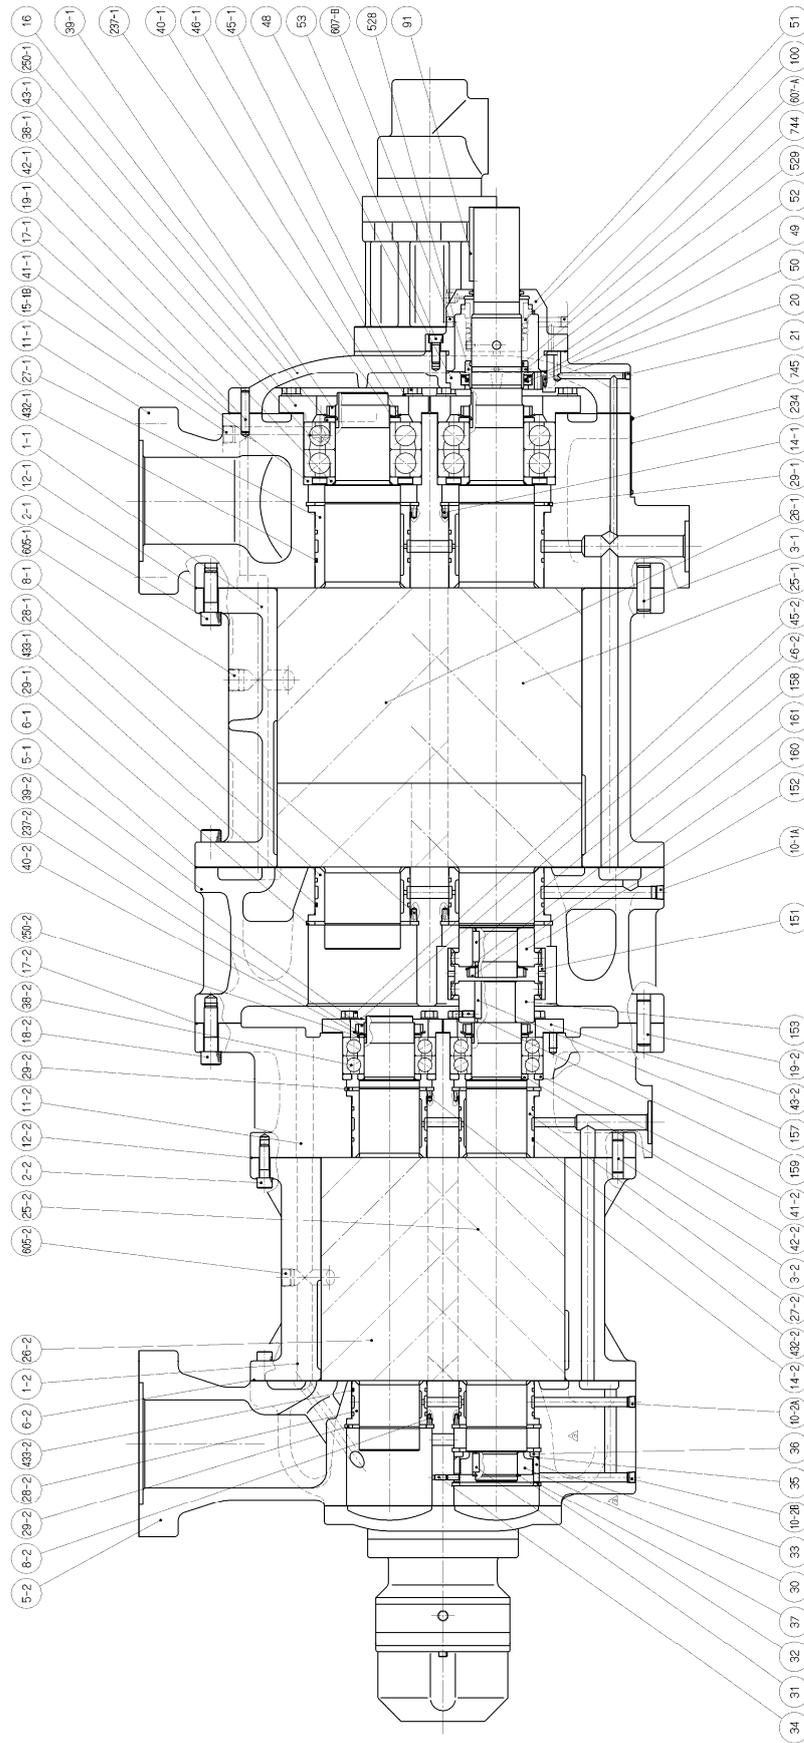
2016LLC Assembly Sectional View (Horizontal)
